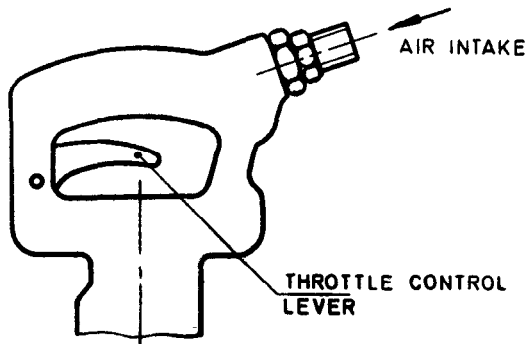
CLOSED HANDLE WITH FINGER LEVER THROTTLE CONTROL, TYPE C
